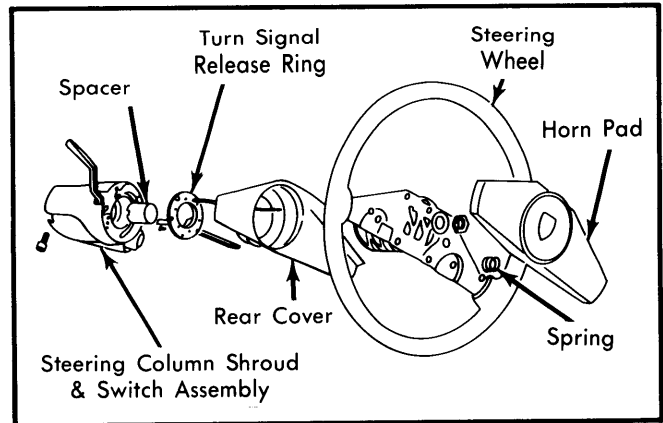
Exploded View of Porsche 924 Steering Wheel and Related Components
